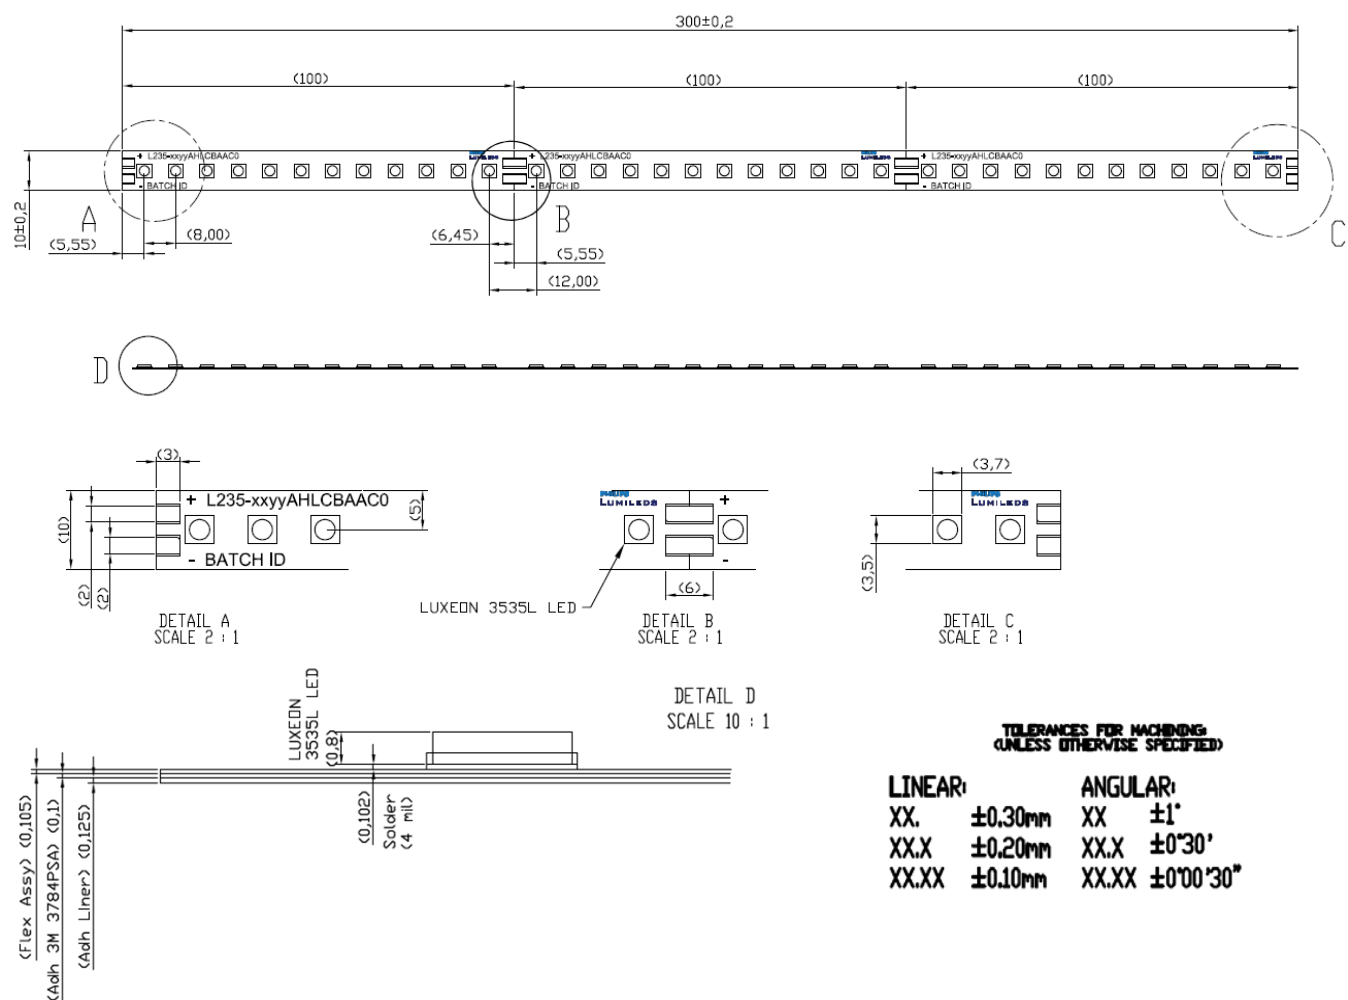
Mechanical drawing for L235-xyyyAHL CBAACO.
